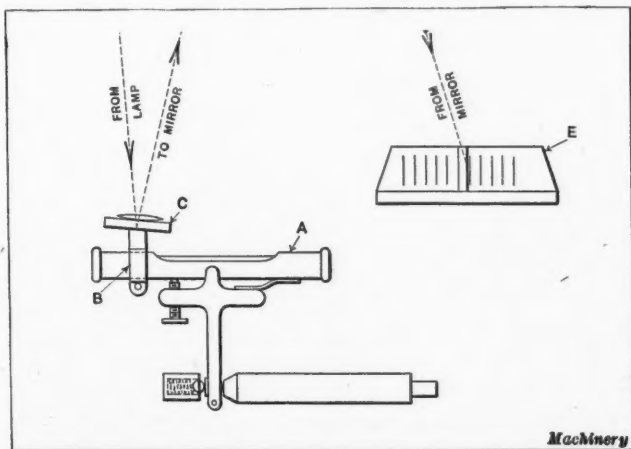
Optical Attachment for Standard Type Measuring Machine
